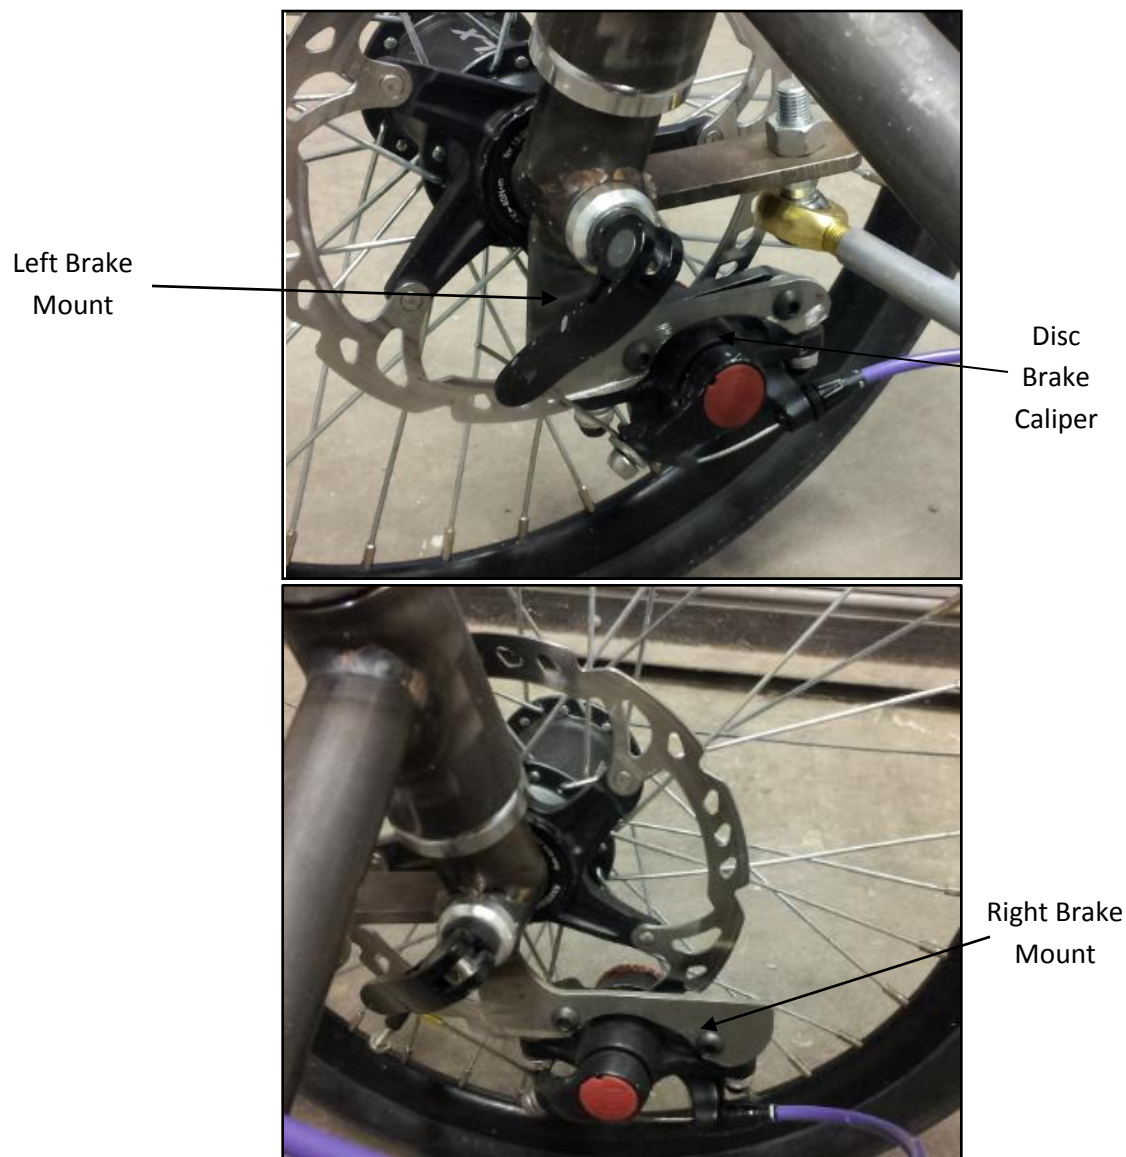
Disc brake mount for a) left side of vehicle. b) right side of vehicle relative to the front view.
